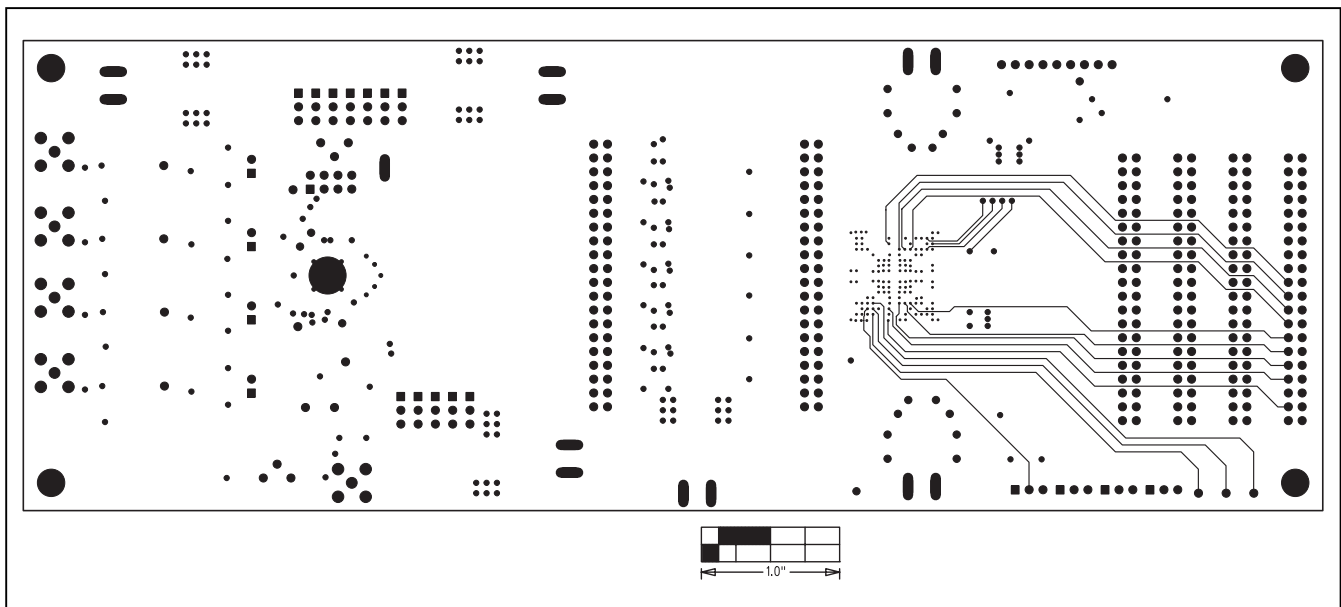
MAX1127 EV Kit PC Board Layout (Inner Layer 5)—Signal Layer
